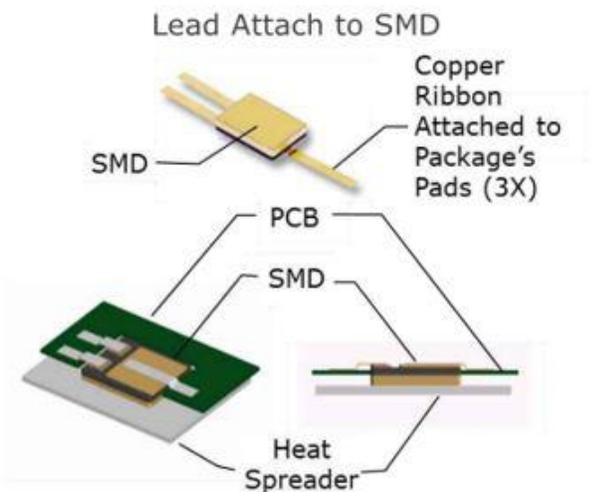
The lead-attach option on an SMD package and a PCB mounting example.
